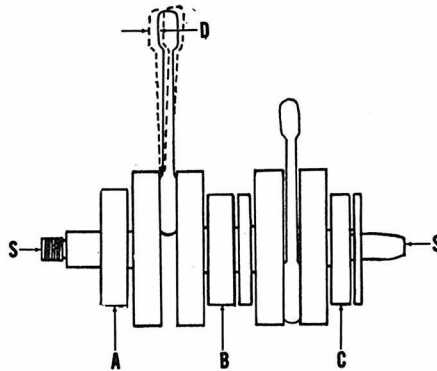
With crankshaft supported on lathe centers at (S), crankshaft eccentricity when measured at points (A, B & C) must be less than 0.0024 inch. Connecting rod shake (D) should be less than 0.118 inch.
